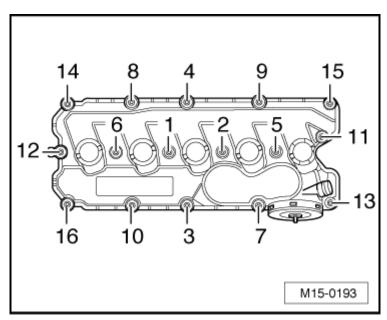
Removing Bolts For Cylinder Head Cover In Sequence Courtesy of VOLKSWAGEN GROUP OF AMERICA, INC.
